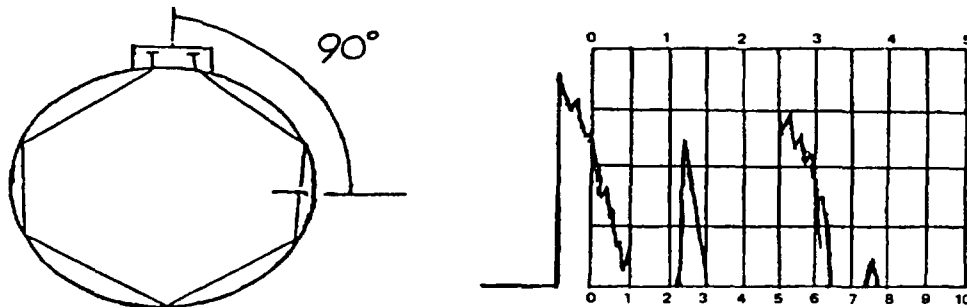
Location of surface flaw on rod using twin angle probe.
